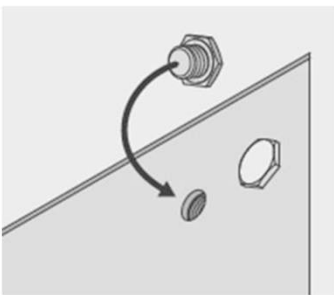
Remove assembling accessories, check if the inside of the threaded socket is free from dirt, otherwise clean it
